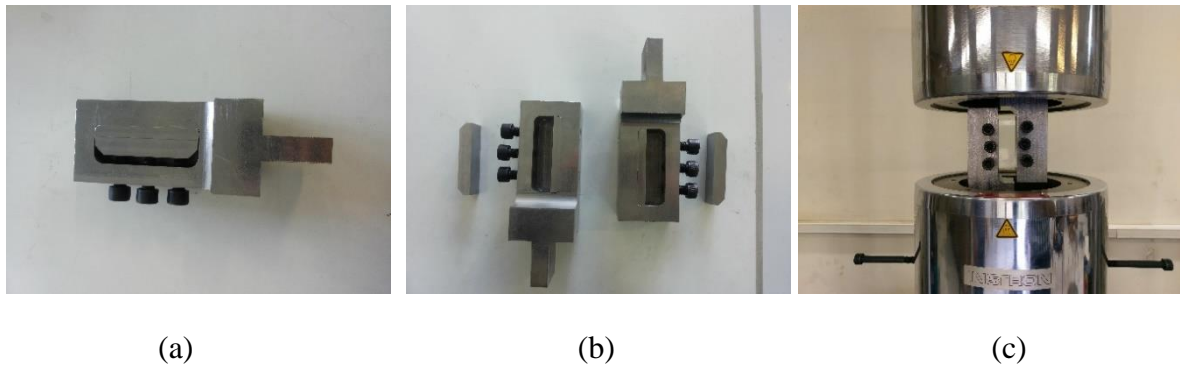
(a) and (b) newly designed fixtures for shear deformation experiments, (c) fixtures in tension machine.
